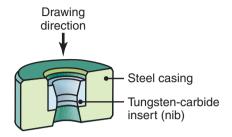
Tungsten-carbide die insert in a steel casing. Diamond dies used in drawing thin wire are encased in a similar manner.
